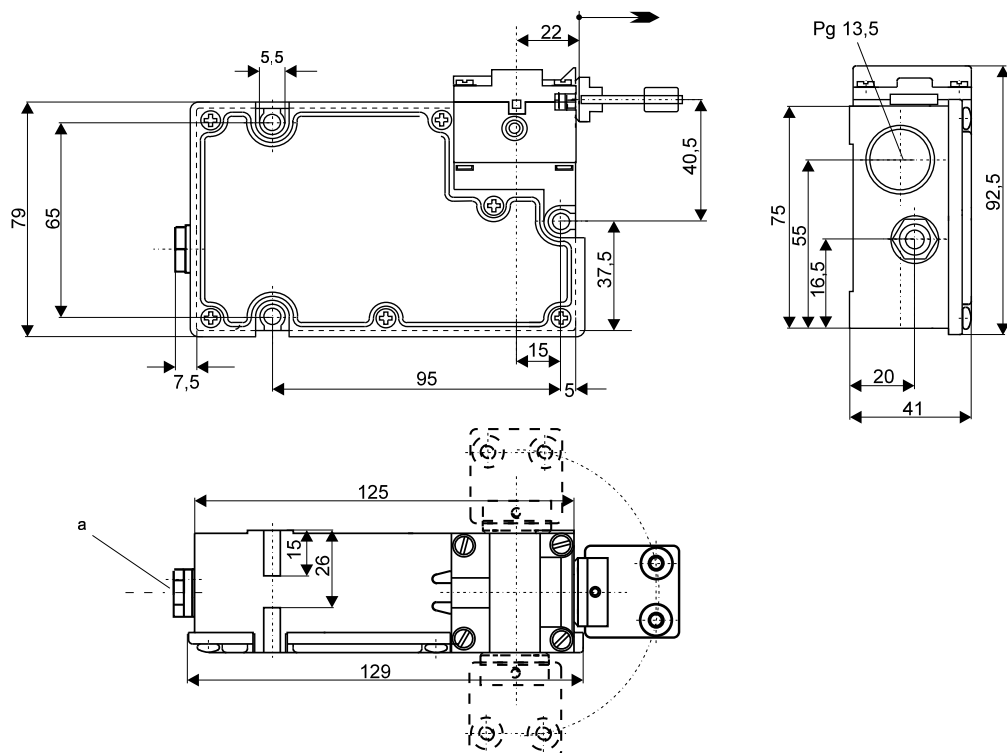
Dimensions – safety interlocking device L50 with auxiliary release
